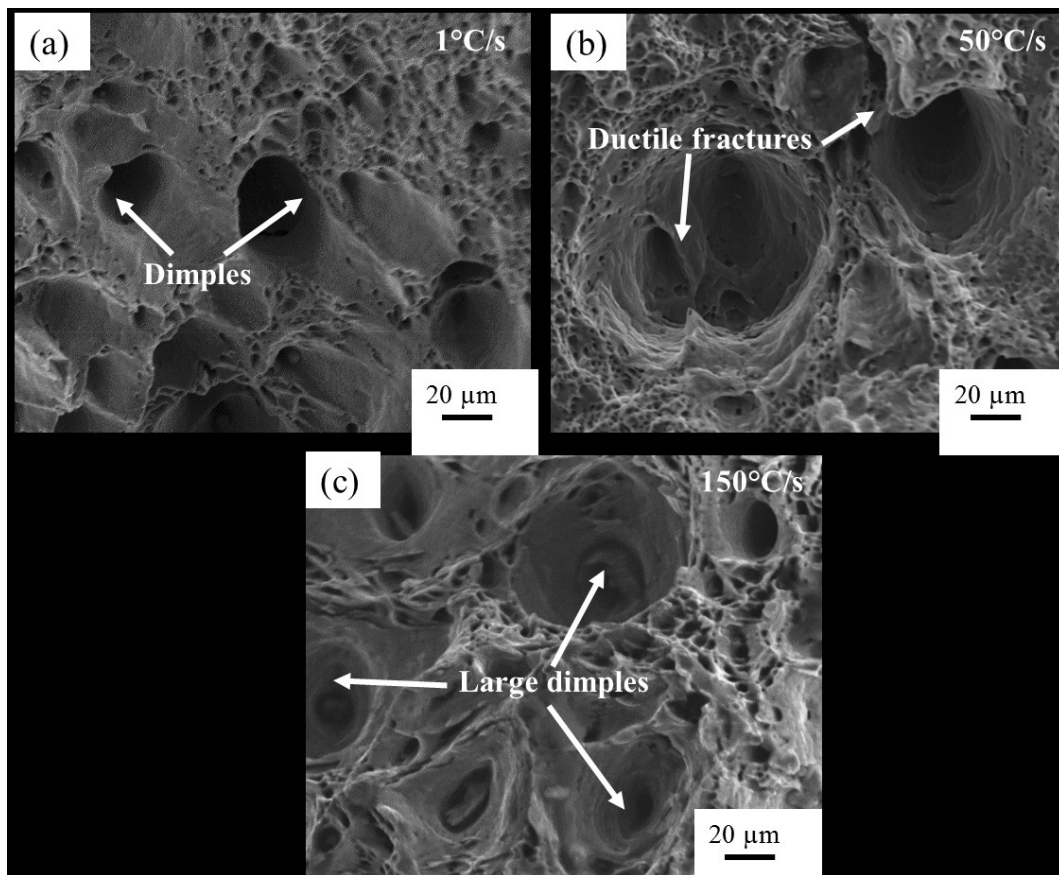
Morphology of the fracture surface of uniaxial tensile specimens at (a) 1°C/s, (b) 50°C/s and (c) 150°C/s.
